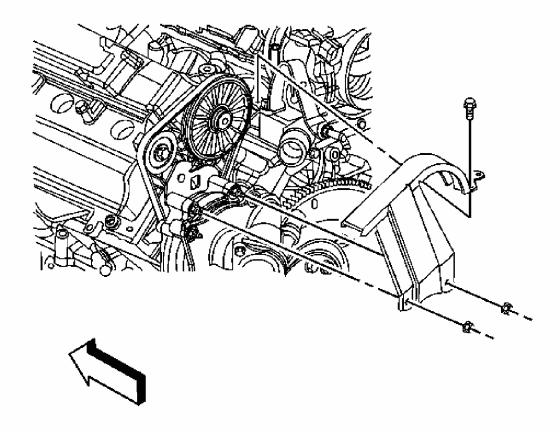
View Of Water Pump Drive Belt Tensioner Shield Courtesy of GENERAL MOTORS CORP.
